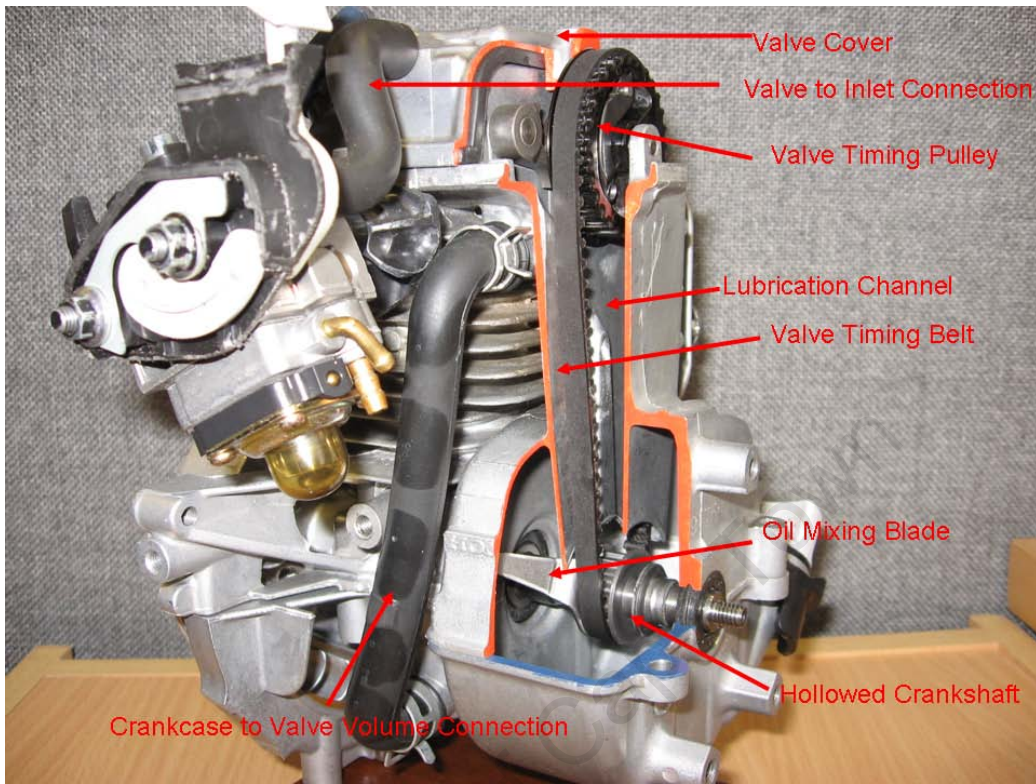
Engine Cutout Showing Oil Mixing Mechanism and Valve Timing Mechanism and Lubrication Channel
